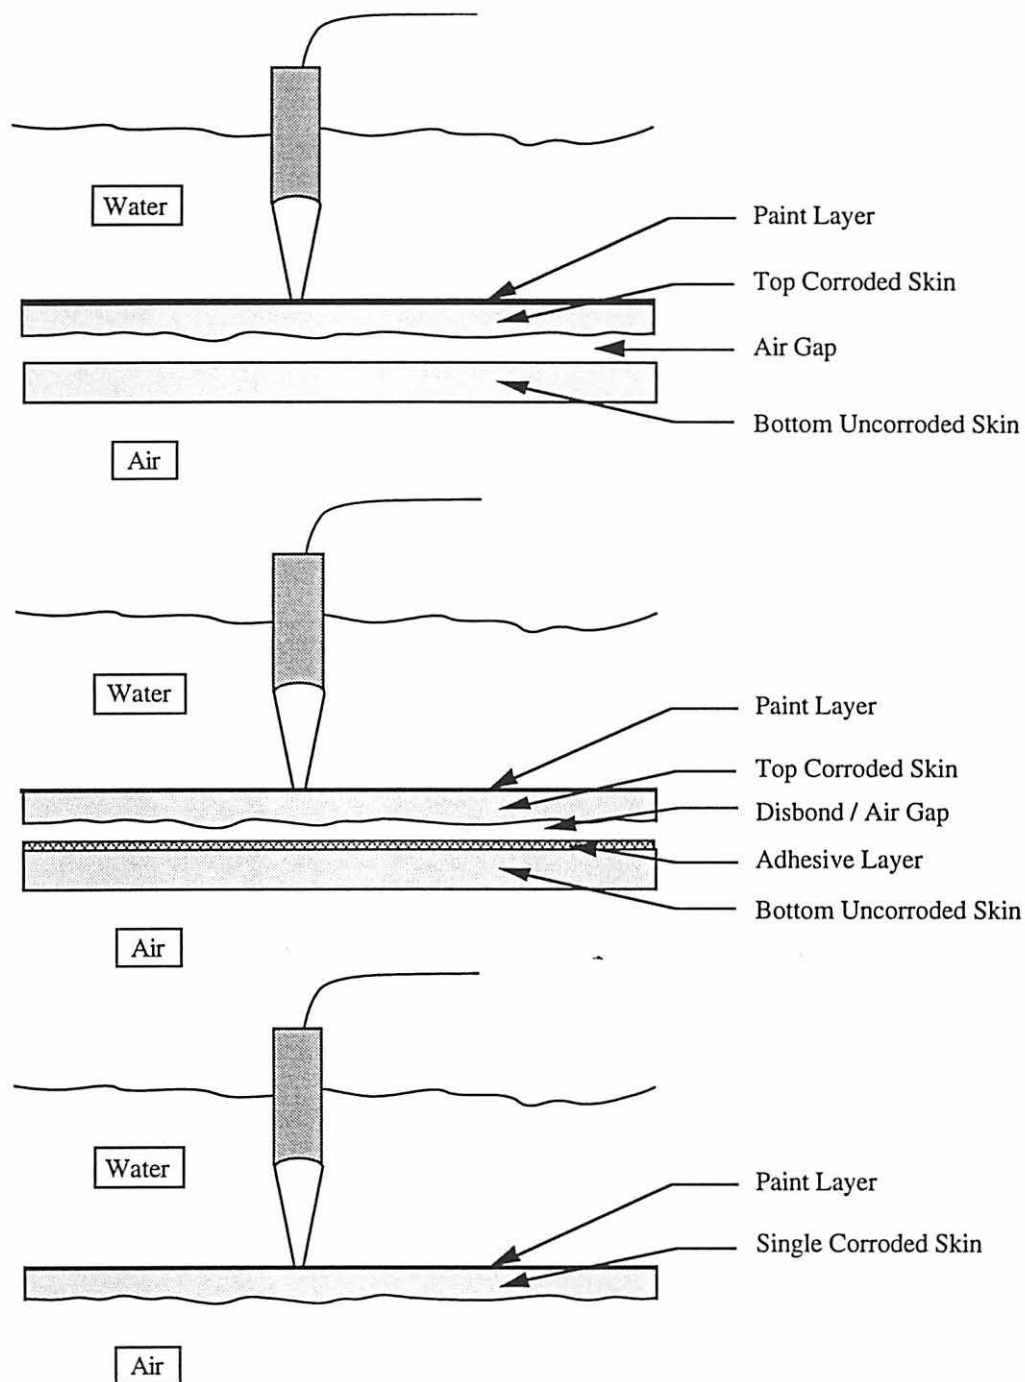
Side view of three samples containing first layer corrosion defects that give similar ultrasonic signatures. (a) Two aluminum skins fastened together with corrosion located interior to the splice and no adhesive bond. (b) Two aluminum skins fastened together with a disbond located between adhesive layer and the top corroded aluminum surface. (c) Single corroded aluminum skin.
